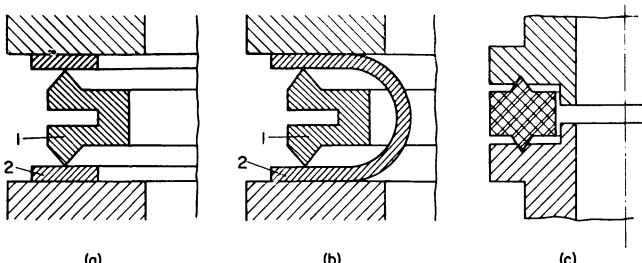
Knife-edge seals with attached rings: (a) steel ring (1) sealing on two copper washers (2); (b) steel ring sealing on a single U-shaped copper washer. After Robinson¹⁰⁷³ (*Courtesy of The Institute of Physics and The Physical Society, London*); (c) ceramic ring sealing on copper parts. After Cohen²²⁰ (*Courtesy of the American Institute of Physics*)
